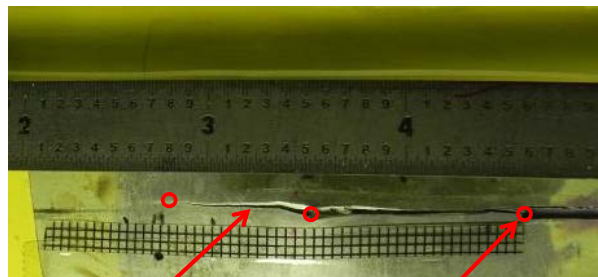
Locations of impact damage and crack extension for the R-BE repair after impact
